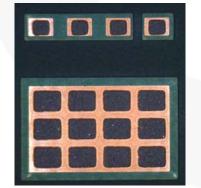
Sample Solder Paste Test Print on SMD Land Pads
